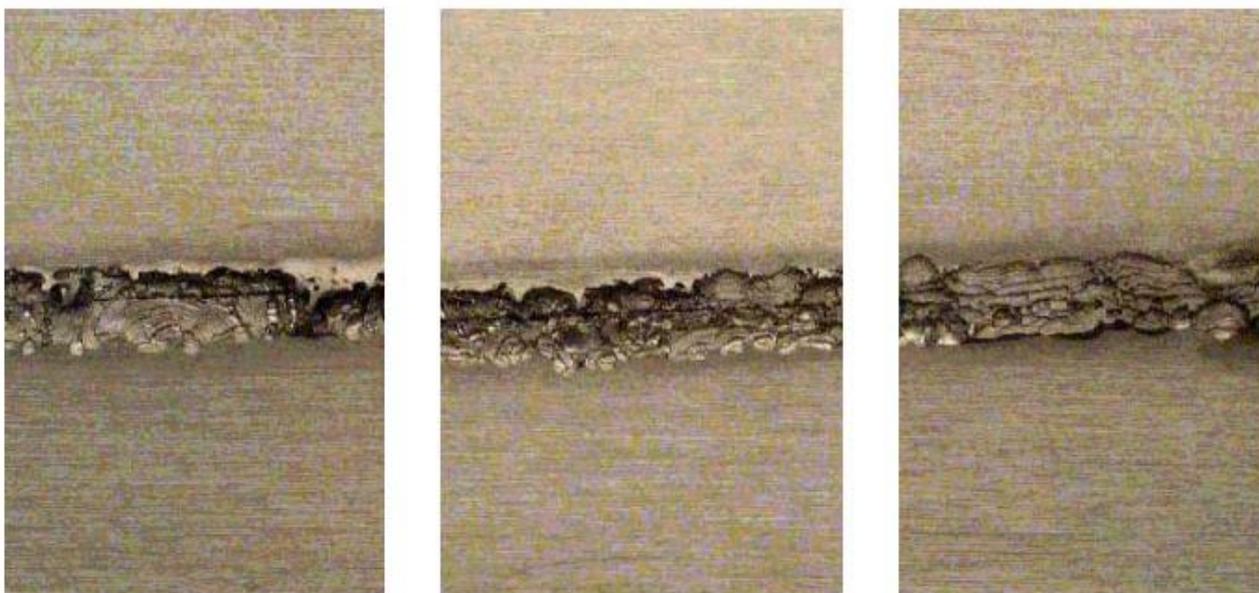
INCONEL C-276 welded with INCO-WELD C-276 filler metal (pitting resistance of various base metal and weld metal combinations).
